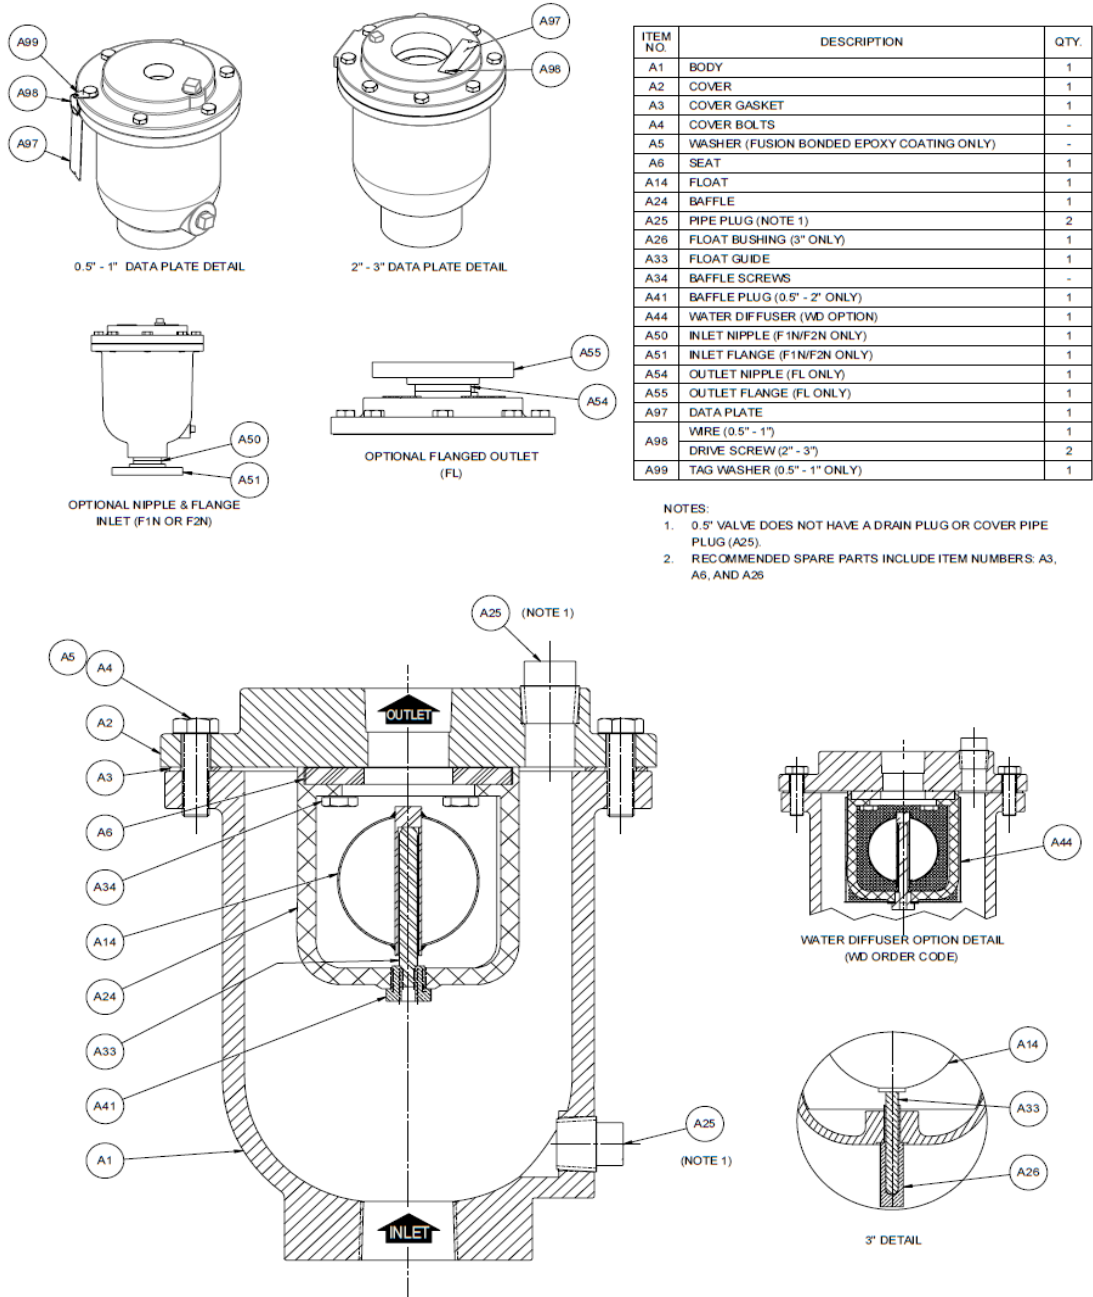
AVV-140 1-3" (25-80mm) Air/Vacuum Valve
